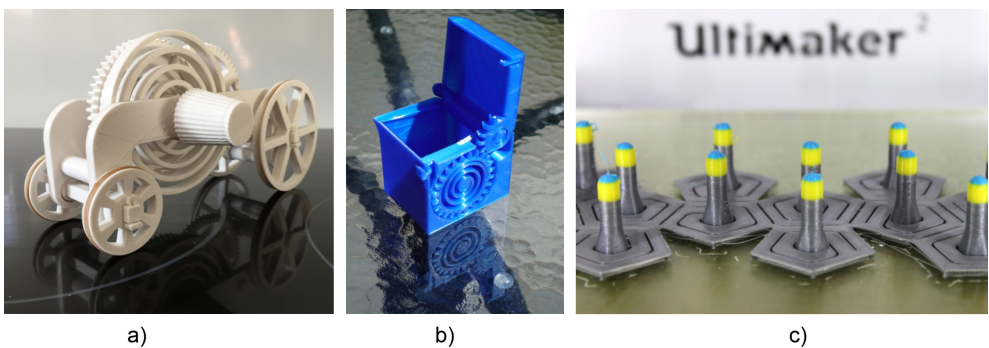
Examples of 3D printed spiral springs. a) Spring-propelled toy car [70]. b) Non-assembly spring loaded box with integrated spiral spring and gears [76]. c) Hexagonal shaped spirals connected to each other, which can be printed as a single sheet and afterwards folded into a 3D-shape [79].
